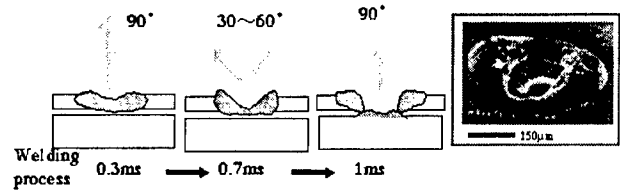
Illustration of welding process corresponding to Fig.8(a).
